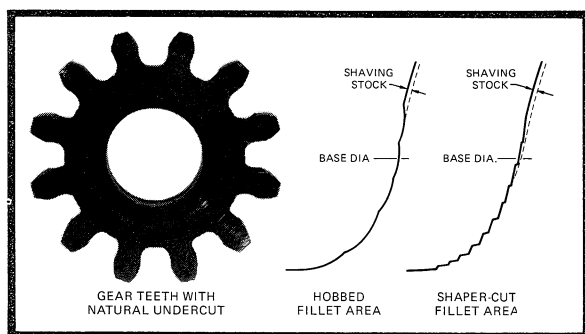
A 12-tooth pinion, left, showing natural shaper-cutter undercut. Enlarged fillets, right, show type of finish generated by hobbing and shaping.
